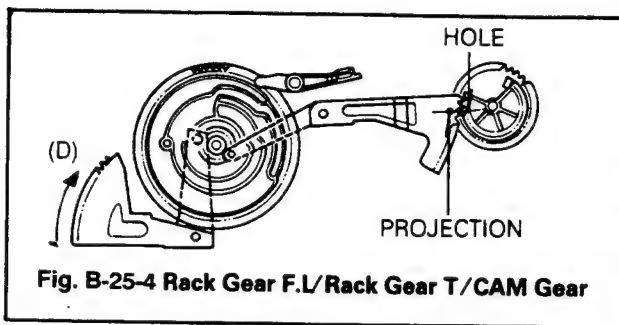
Rack Gear F.L./Rack Gear T/CAM Gear
